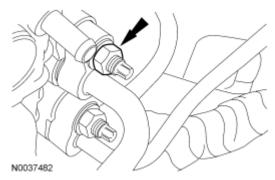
Locating A/C Tubes Nuts Courtesy of FORD MOTOR CO.
